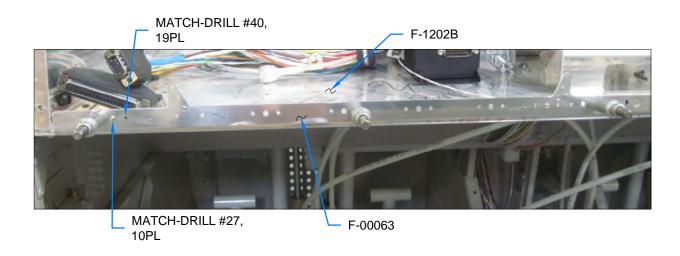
MATCH-DRILLING HOLES FOR THE DOUBLER
